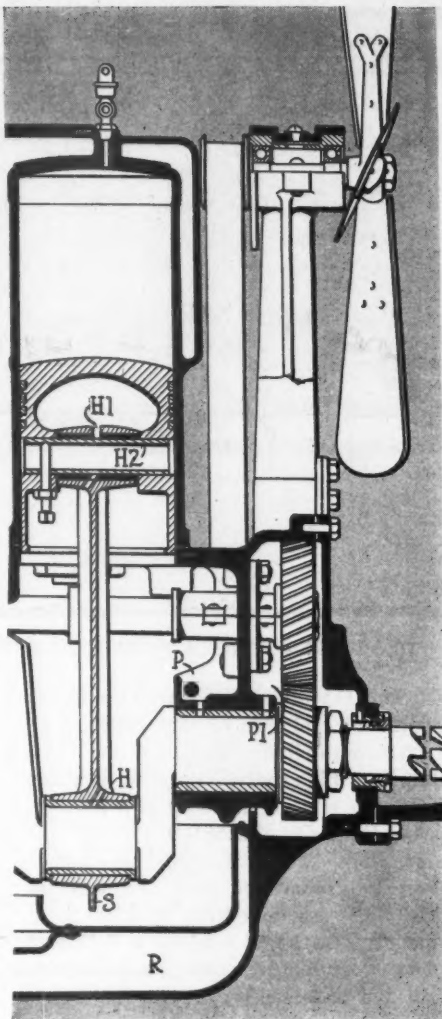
THE CONNECTING ROD OILING SYSTEM. S, DIPPER; H, OIL RUN TO CONNECTING ROD BEARING; H1 AND H2, WRIST PIN OILERS. ILLUSTRATION ALSO SHOWS HOW COMBUSTION SPACE AND CYLINDER HEAD ARE WATERJACKETED
